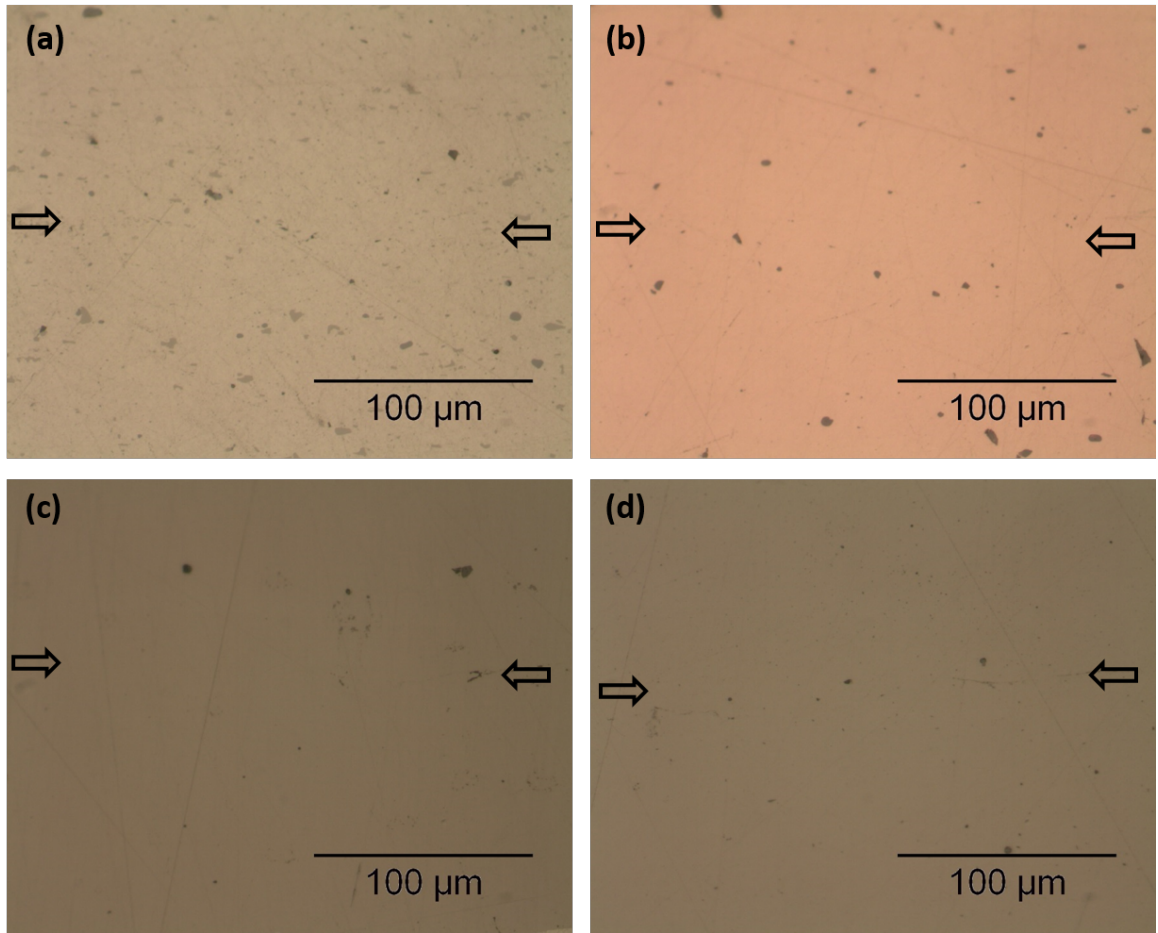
Weld interface examination: (a) Al 6061-T6 onto Al 6061 T6; (b) 110 Cu onto Al 6061-T6; (c) 4130 steel onto Al 6061-T6; (d) 4130 steel onto 4130 steel. Approximate weld interface locations are marked with arrows.
